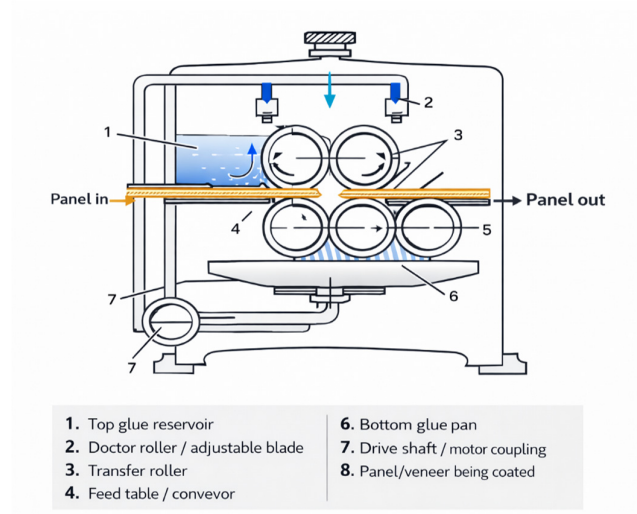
Cross-sectional schematic of the four-roller glue spreader machine used to apply adhesive to both faces of core veneers or panels in bamboo plywood production.
